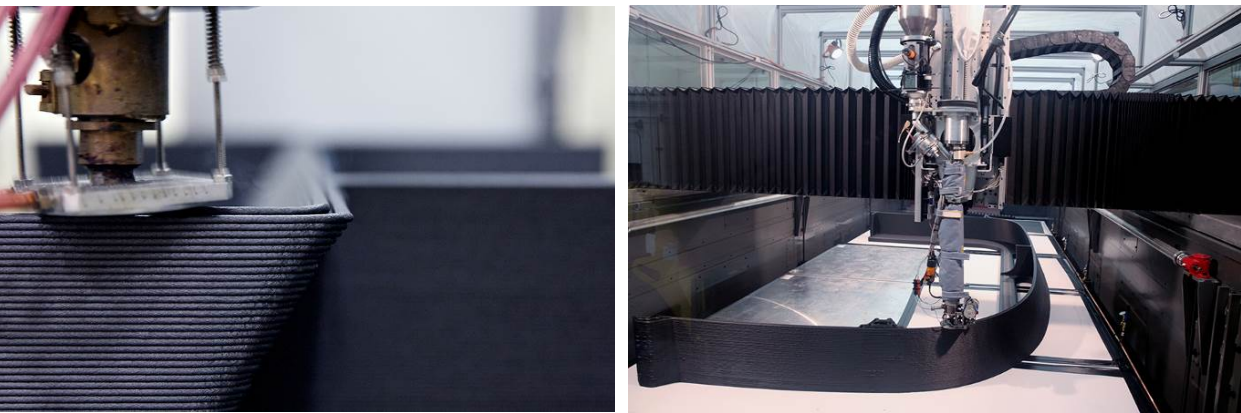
Left: Printing ABS layers; Right: Printing AMIE ring on the BAAM.
